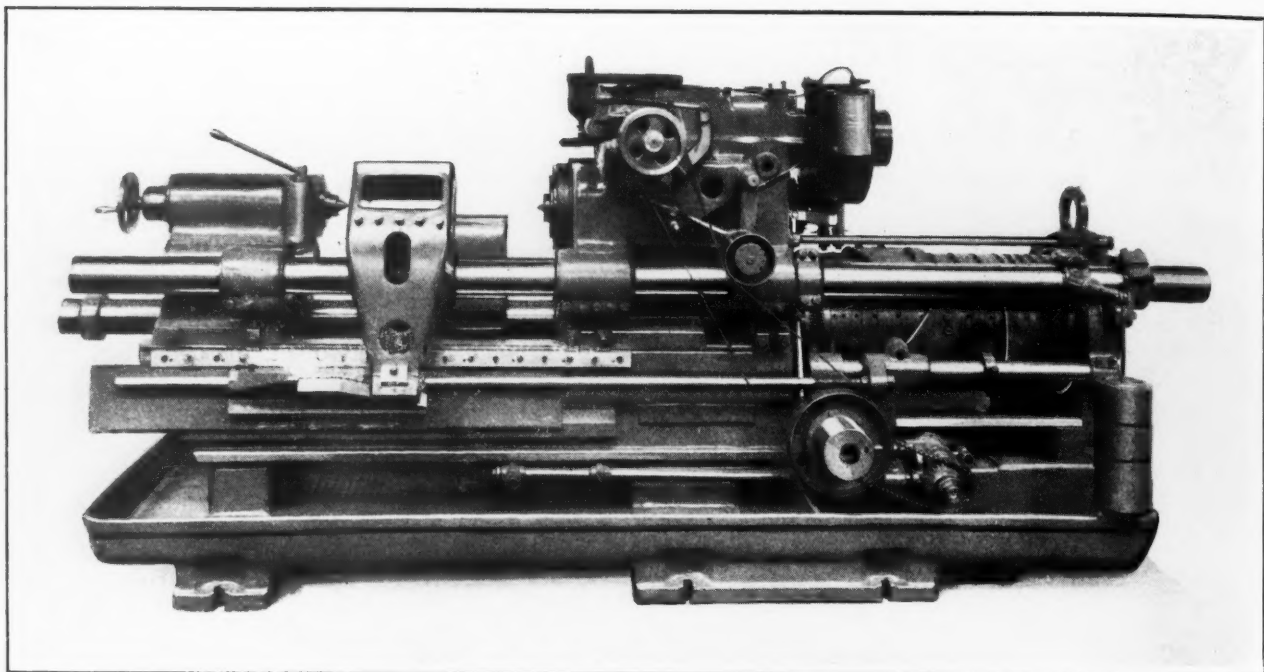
Rear View of Fay Automatic Lathe, with Guards Removed to Show the Back Arm, Former-slide, etc.
